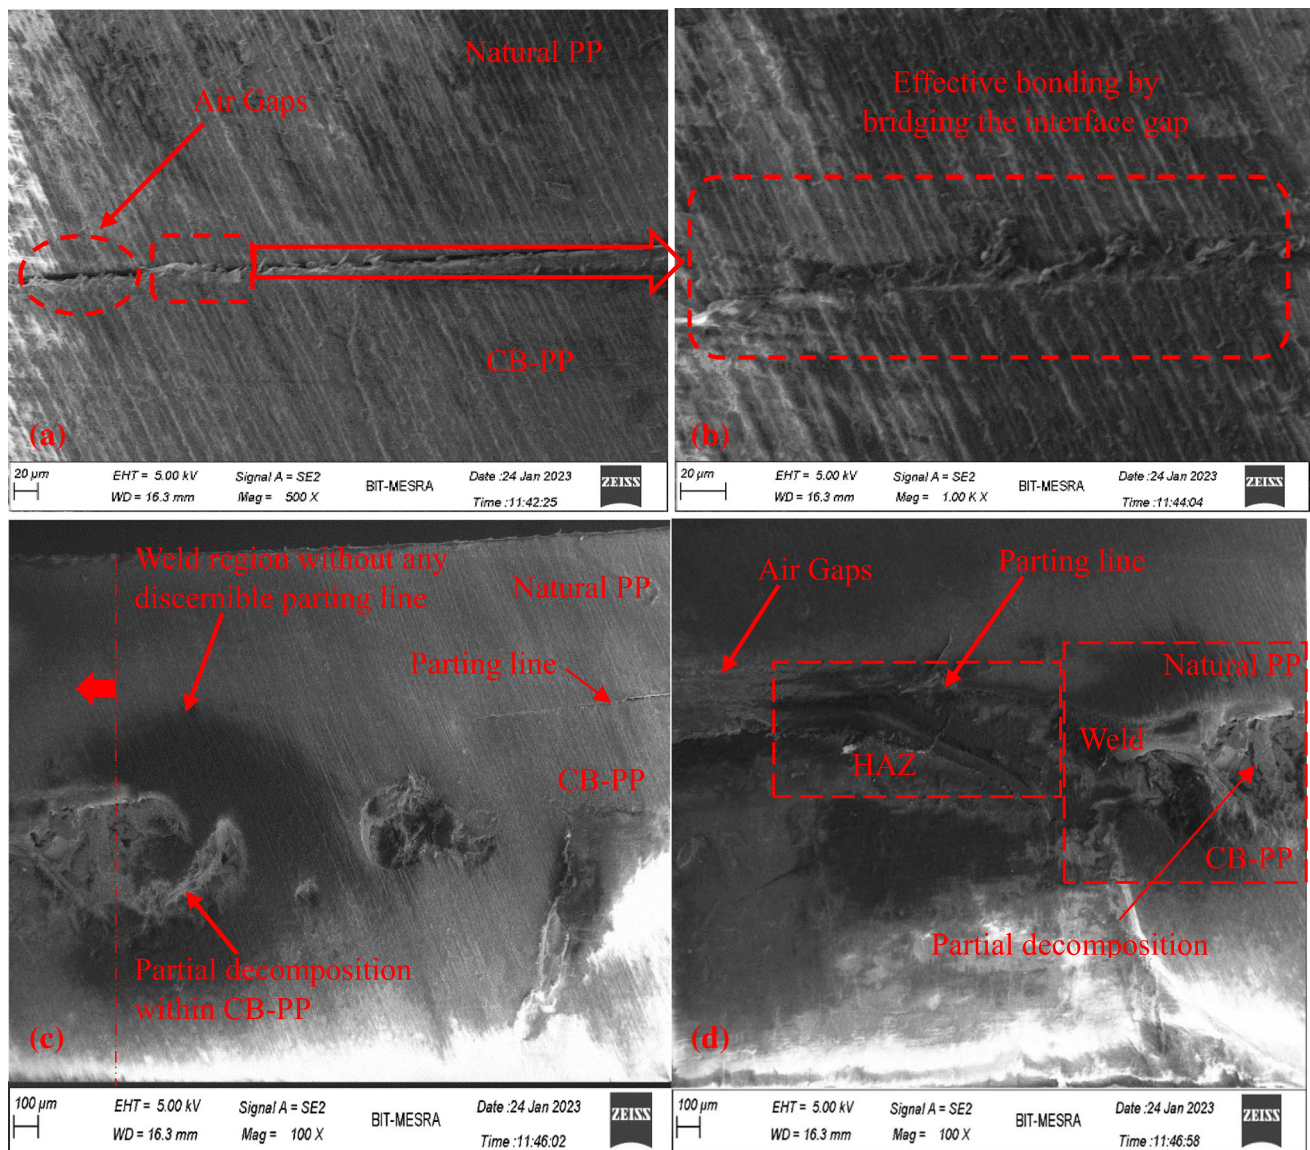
FESEM image of (a) weld cross-section from a sample with shear failure at the interface, (b) high-magnification image showing fusion zone, (c) weld cross-section from a sample failing in fracture from the base polymer, and (d) cross-sectional view revealing both the weld and HAZ
